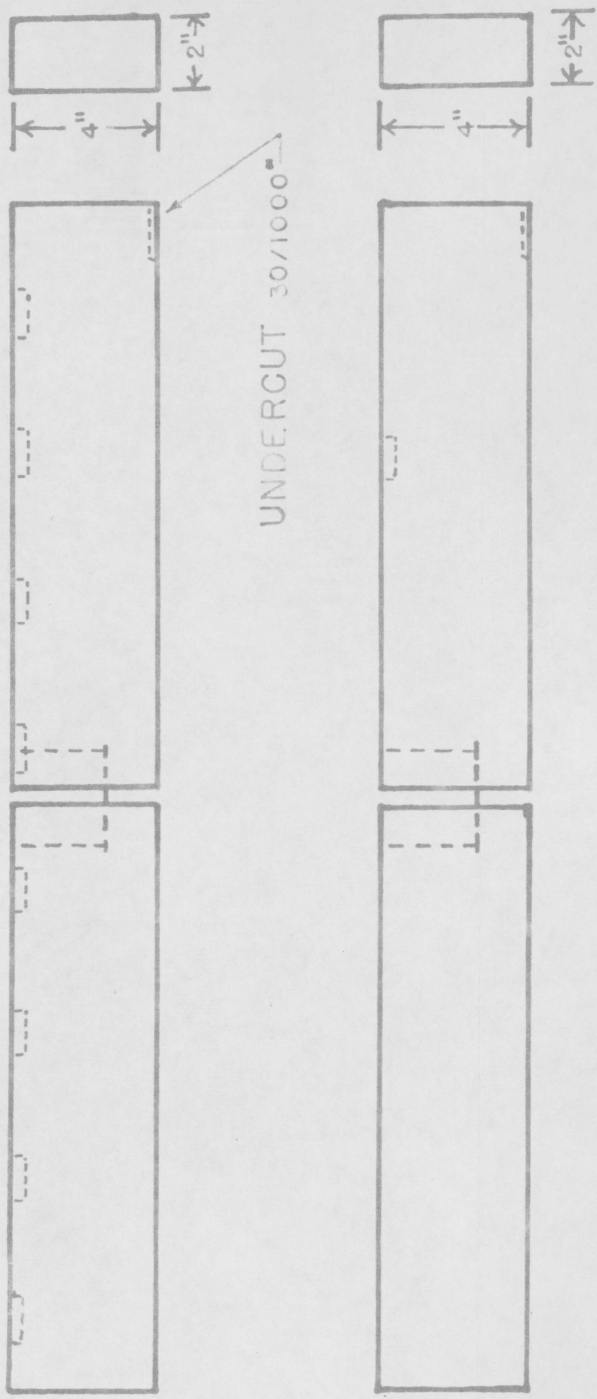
PLAN VIEW OF FOIL BLOCK COUPLING MECHANISM
